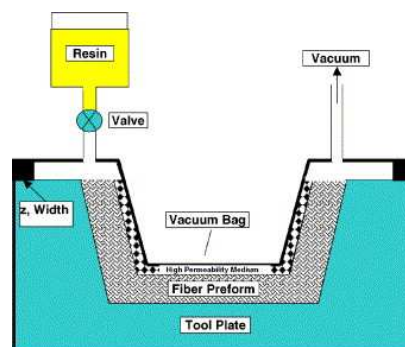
Schematic of the vacuum-assisted resin transfer molding process
